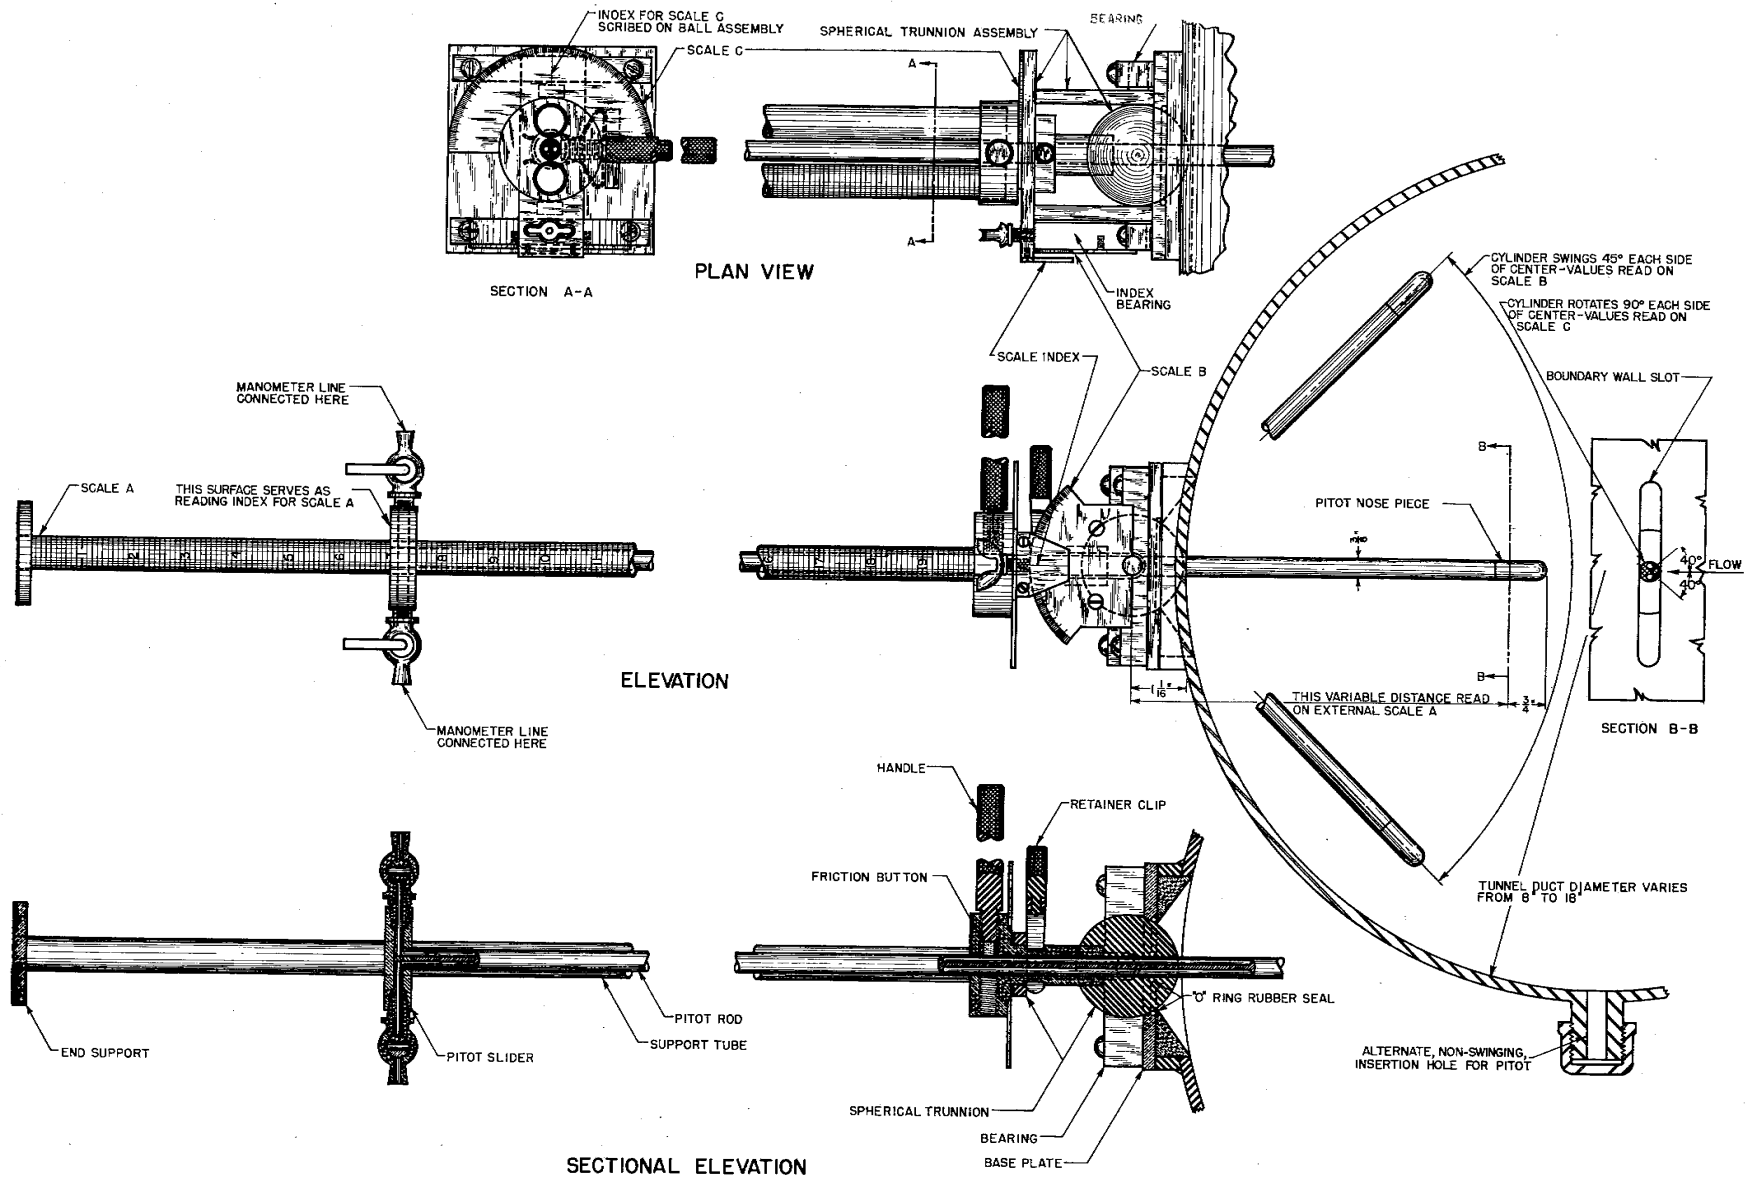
Cantilevered Pitot Cylinder and Mounting
